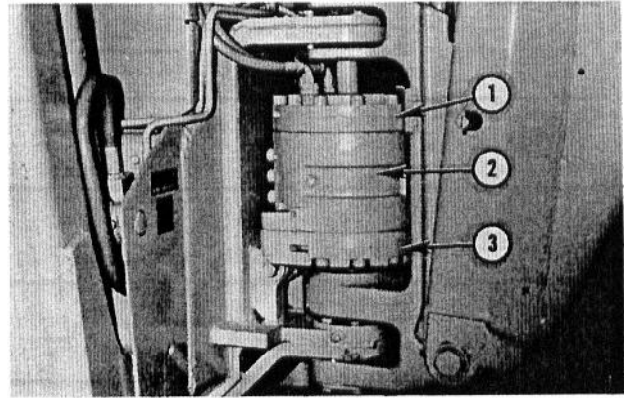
Rotary Swing Cylinder — Installed on MF 54A Backhoe
